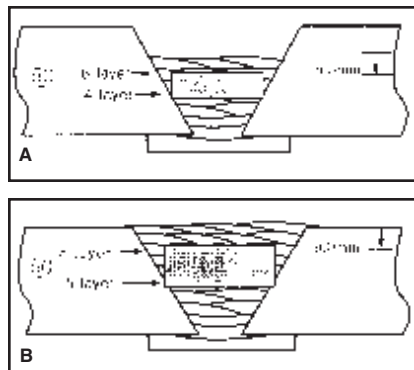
The transverse crack position according to changing welding conditions with the FCAW process. A — 35-mm weld joint; B — 50-mm weld joint.
